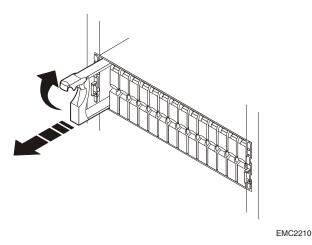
Removing a Disk Filler Module (FC Disk Carrier Shown)
